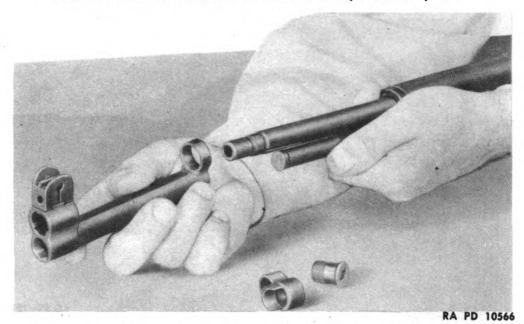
Disassembling Gas Cylinder Group (Spline Type)
